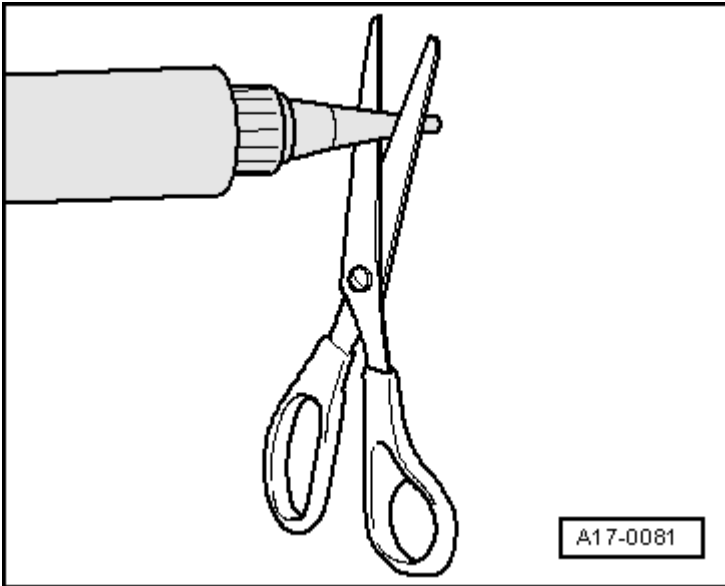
Cutting Tube Nozzle At Front Marking (Nozzle Diameter Approx. 3 Mm)
